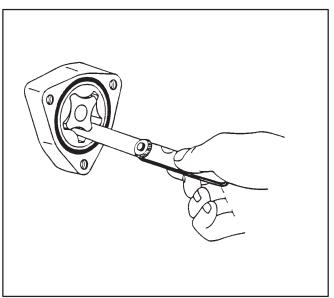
MEASURING ROTOR LOBE COMPO-NENTS
